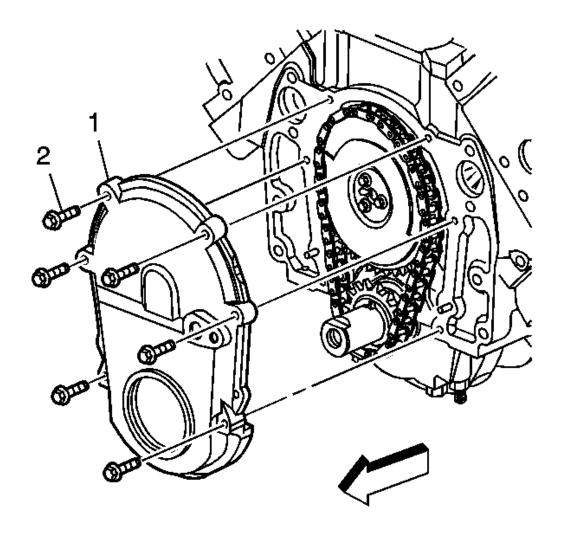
View Of Engine Front Cover & Bolts Courtesy of GENERAL MOTORS CORP.
